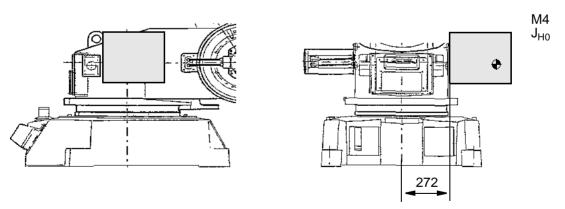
Extra load on frame of IRB 6400S /2.9-120 (dimensions in mm).
